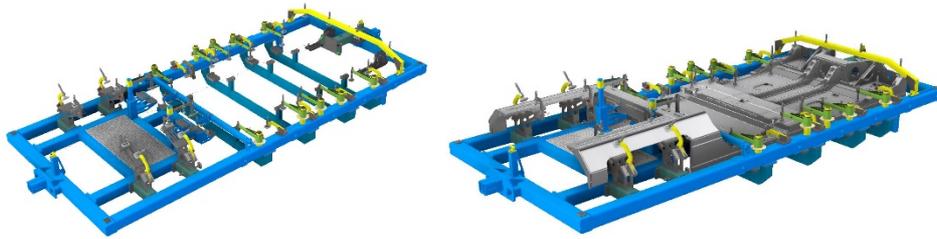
Design of the for the manufacturing of a welded assembly CAD model.
